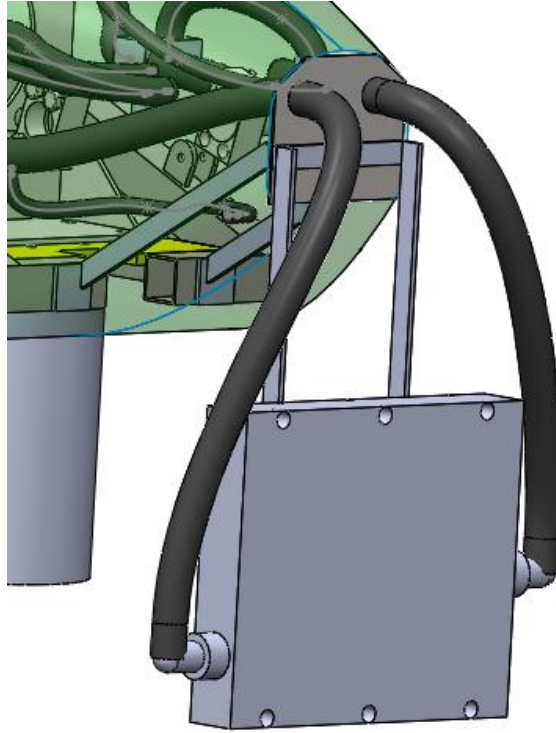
Rear view of the bird plate mount to the frame and the mounting for the heat exchanger and its hoses.
